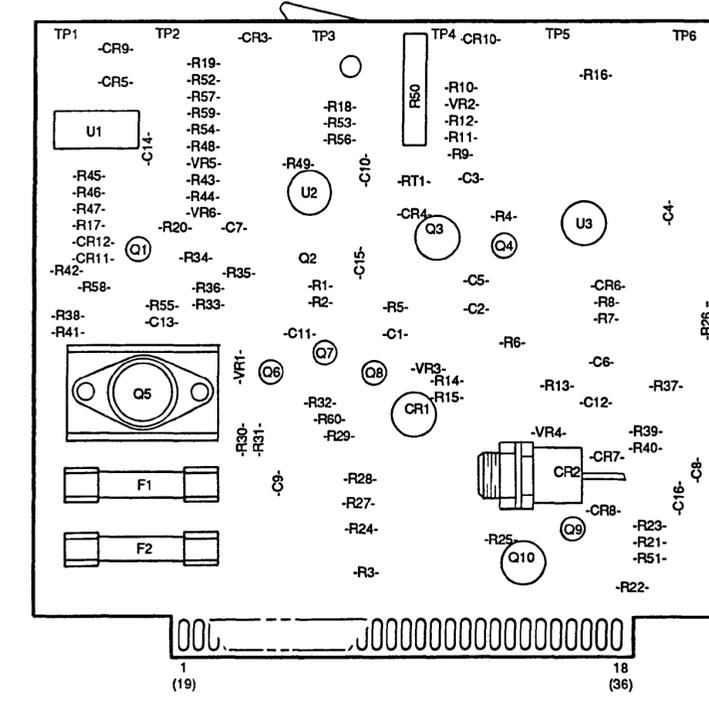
A3 Assembly Component Locator Diagram (Sheet 3 of 5).
